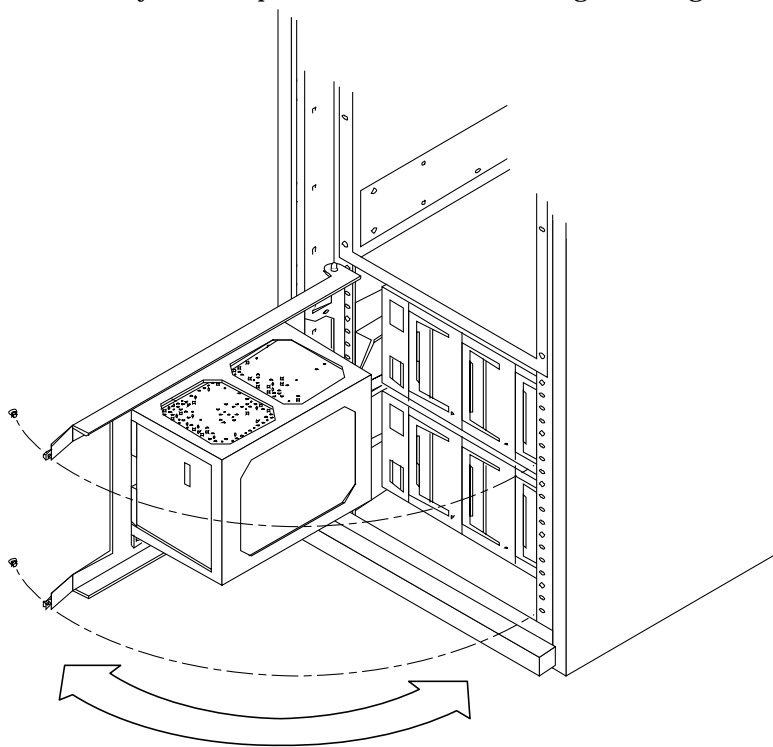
Boot Disk Bracket Installed on the Hinge
